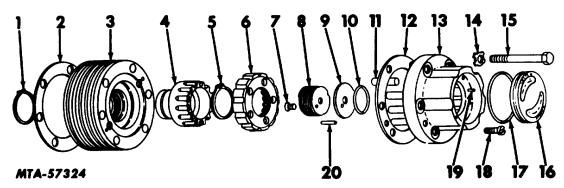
Locking Hub (Manual Type with Hex Head Mounting Bolts) (Exploded View)
